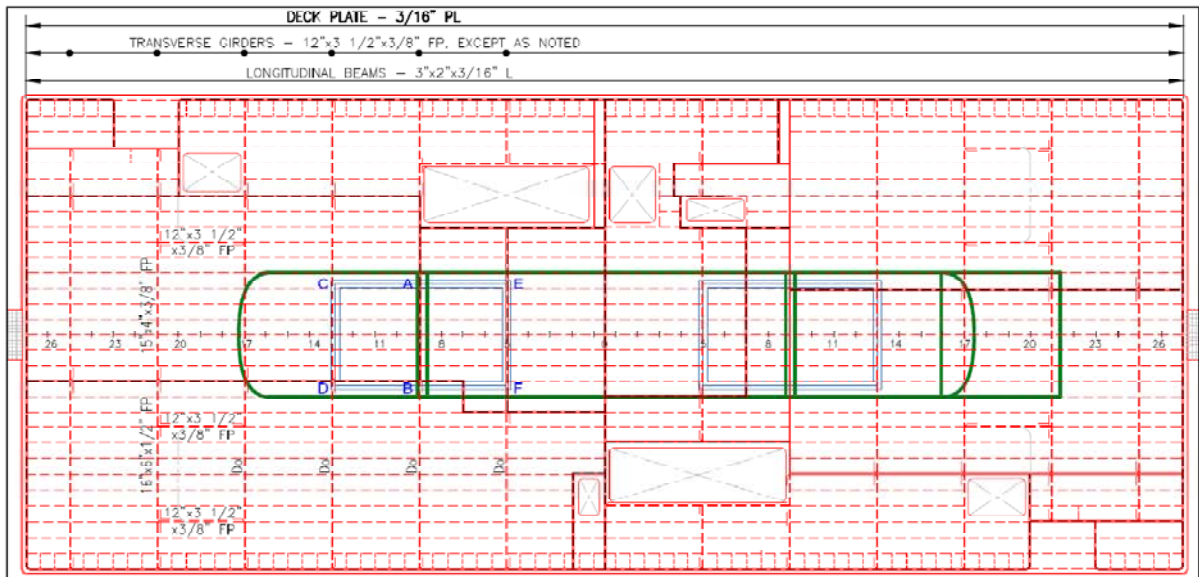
Bridge Deck Structural Arrangement of Single Tank
